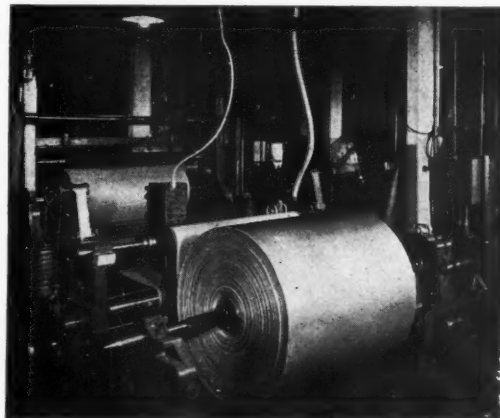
Fast-Running Gummed Cambric Tape Slitter Equipped with Photo-Electric Side Register Control and Constant Tension
